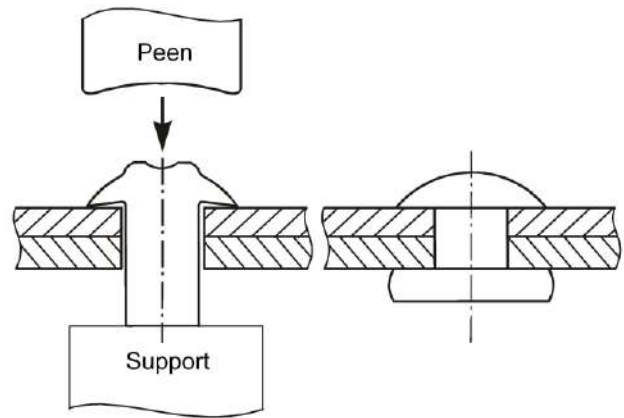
Shaping riveted joint using rivets by OCT 1 34040-79
